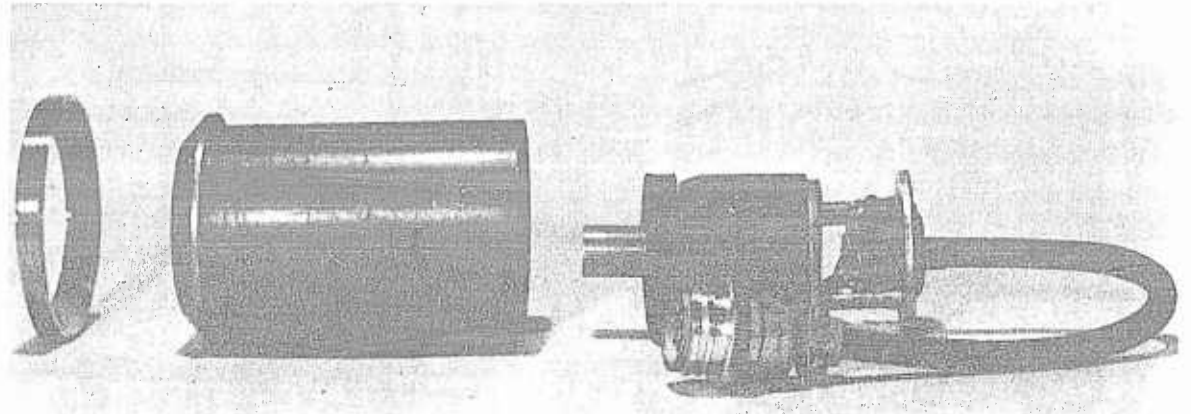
Semiexploded View of Canister for 3PAD Gauge,
